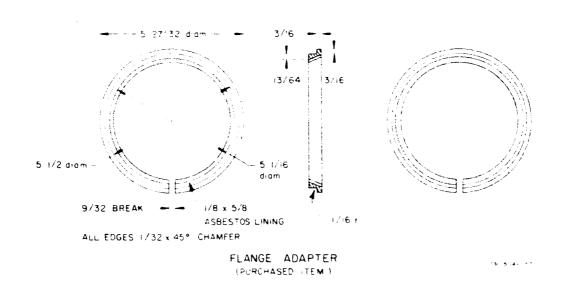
FLANGE ADAPTER DIMENSIONS FOR 8-MONTH-STORAGE TEST UNITS
